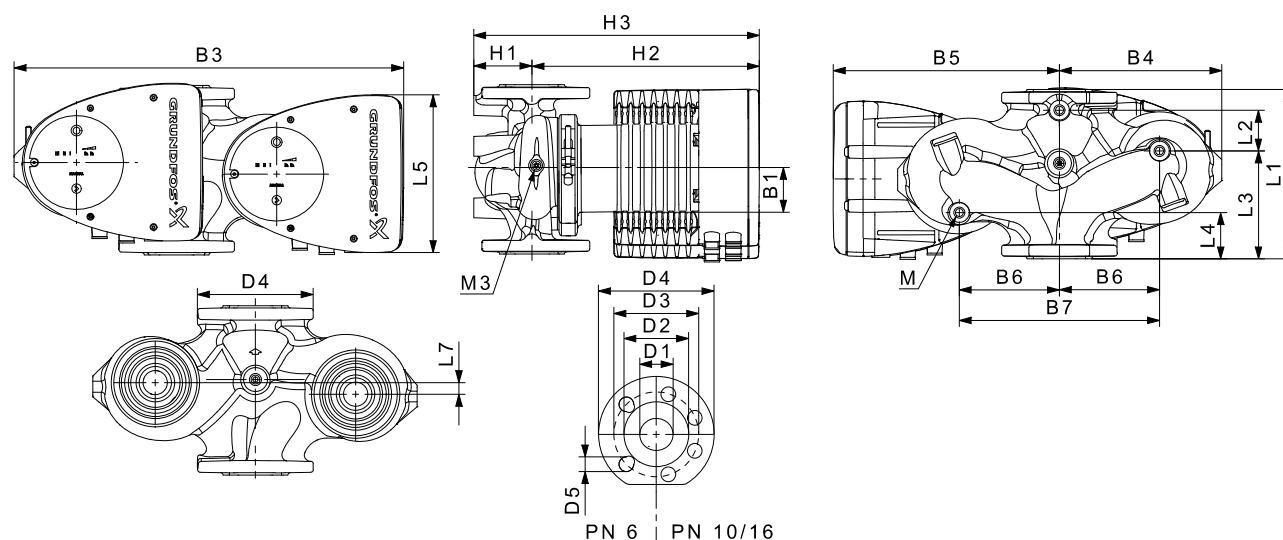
Twin-head pump dimensions, terminal connected versions (flanged version)
